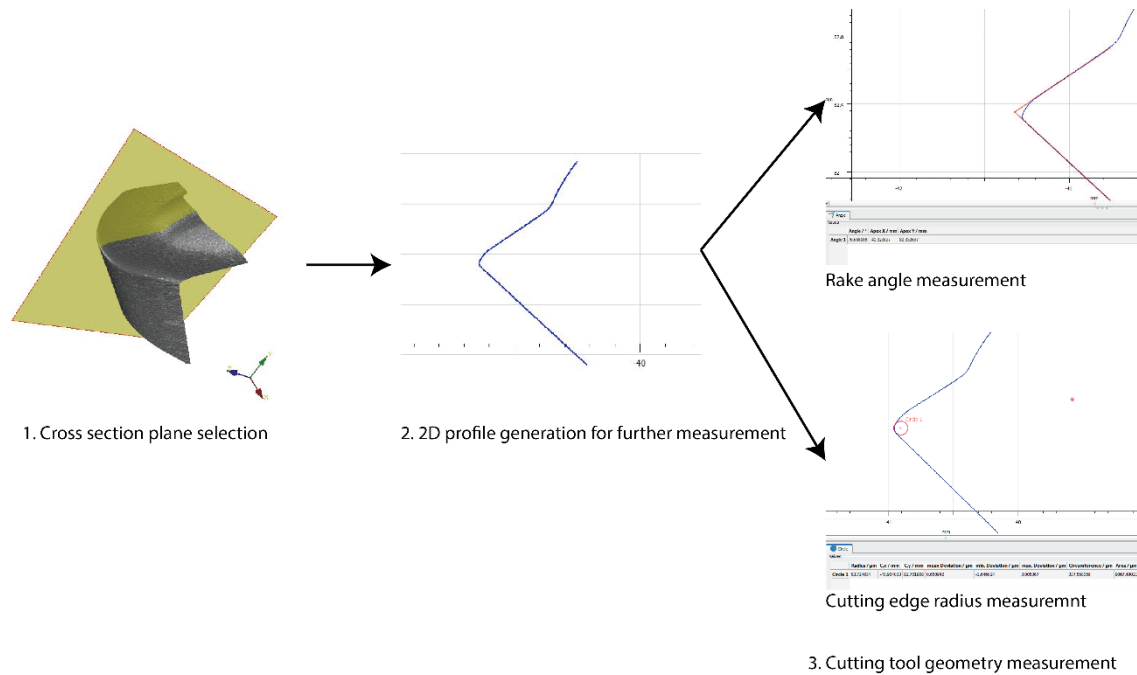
Cutting tool geometry measurement (measurement process steps)
